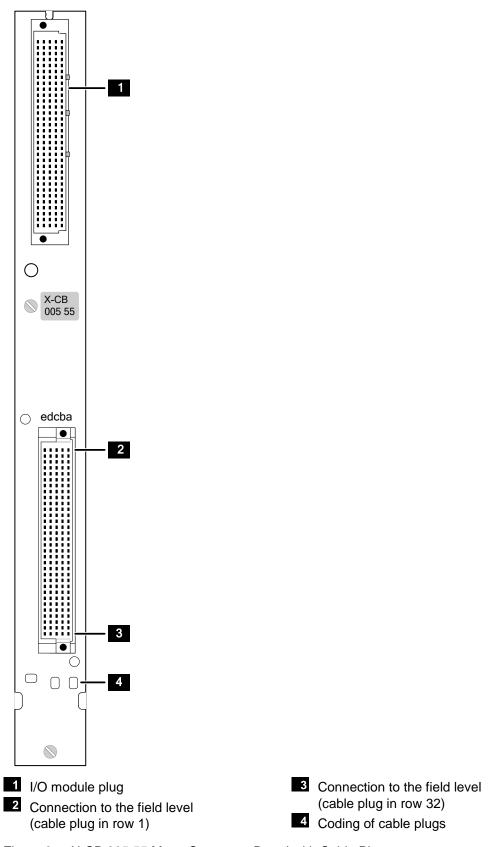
X-CB 005 55 Mono Connector Board with Cable Plug
